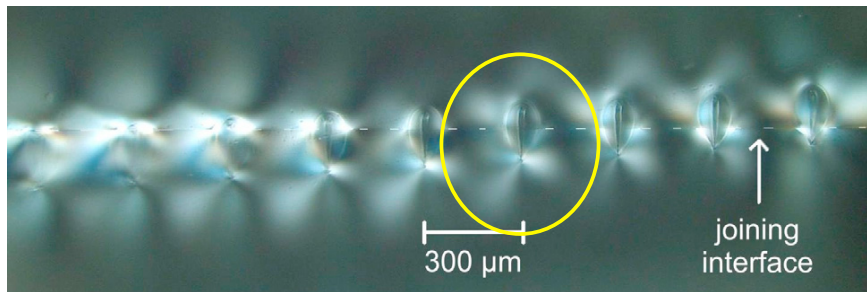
Cross sections of two welded D263 glass plates observed under crossed polarizers. The focus displacement perpendicular to the joining interface is set in steps of 10 μm . Each welding seam was carried out under the same welding conditions: NA = 0.55, P = 6 W, v = 20 mm/s, f = 1 MHz. Laser beam propagation direction is indicated by the red arrow
